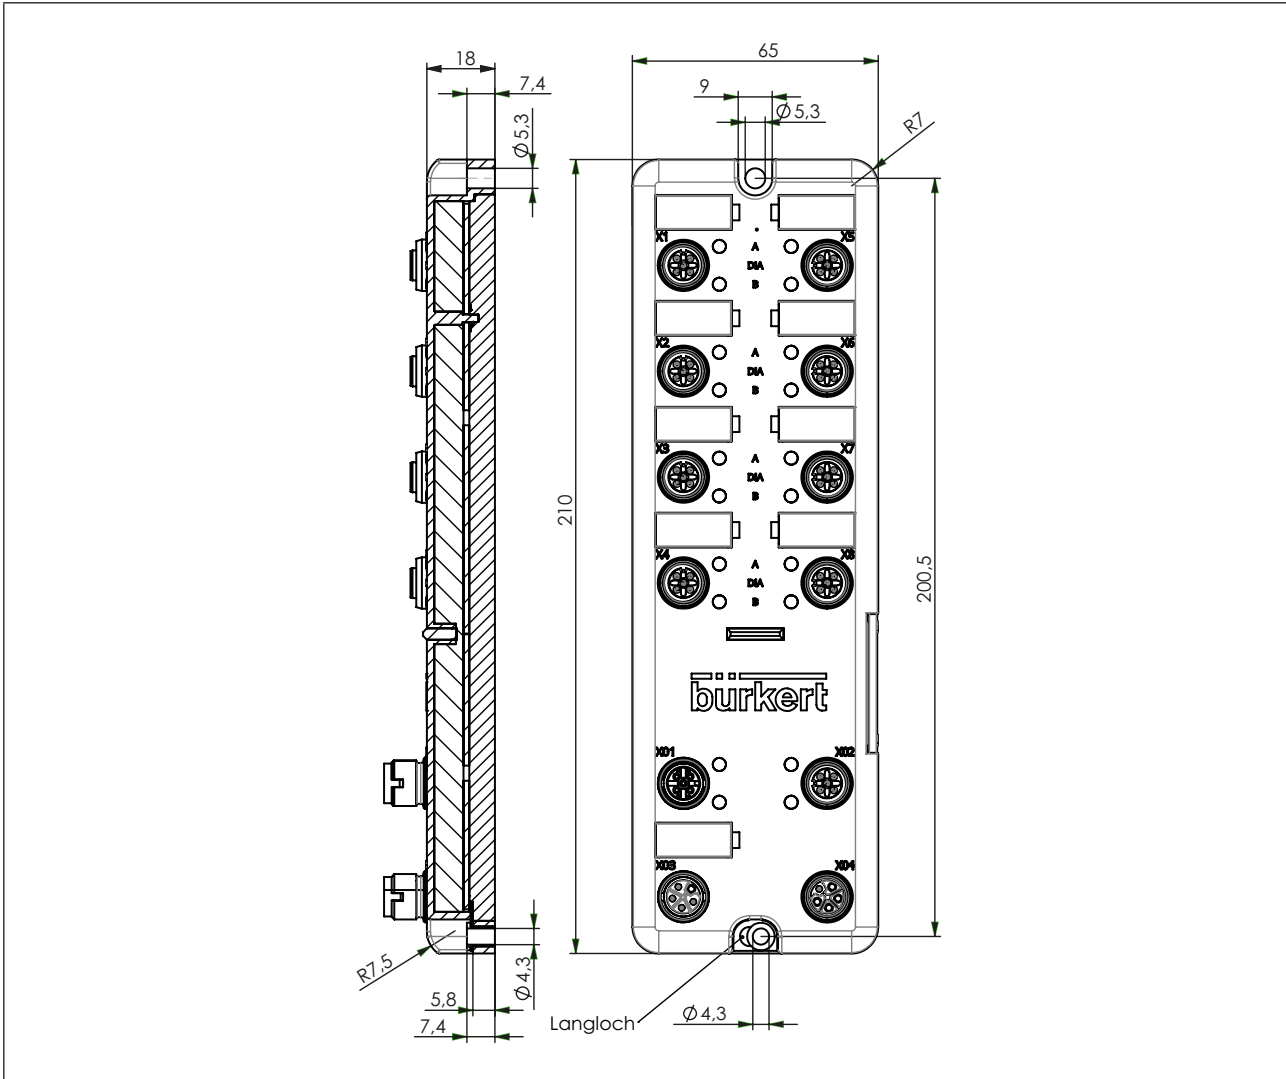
Dimensions of I/O module Type ME64 FieldConnect
